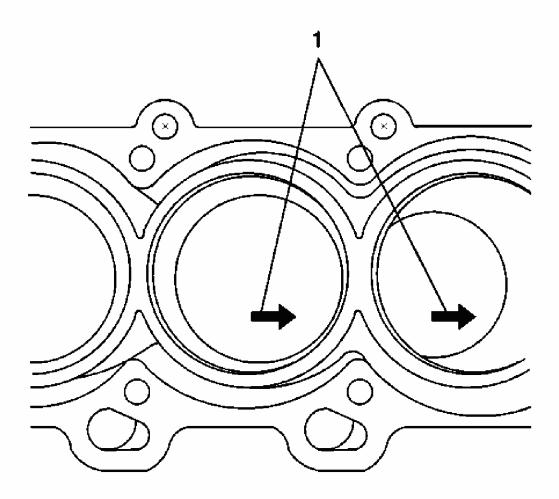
View Of Locating Arrow On Top Of Pistons Courtesy of GENERAL MOTORS CORP.
